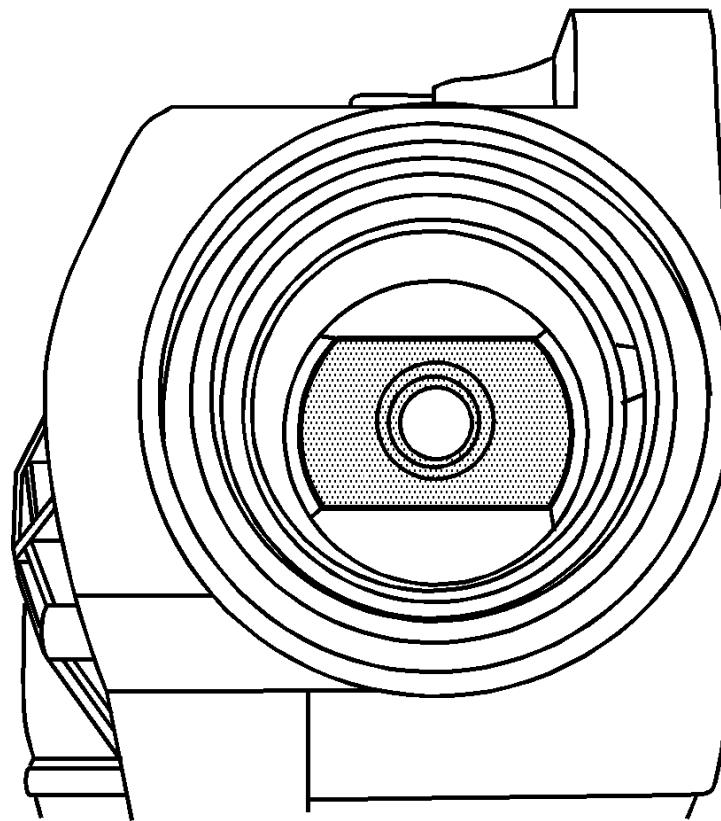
J 45858-5 Into Pinion Bearing Bore
